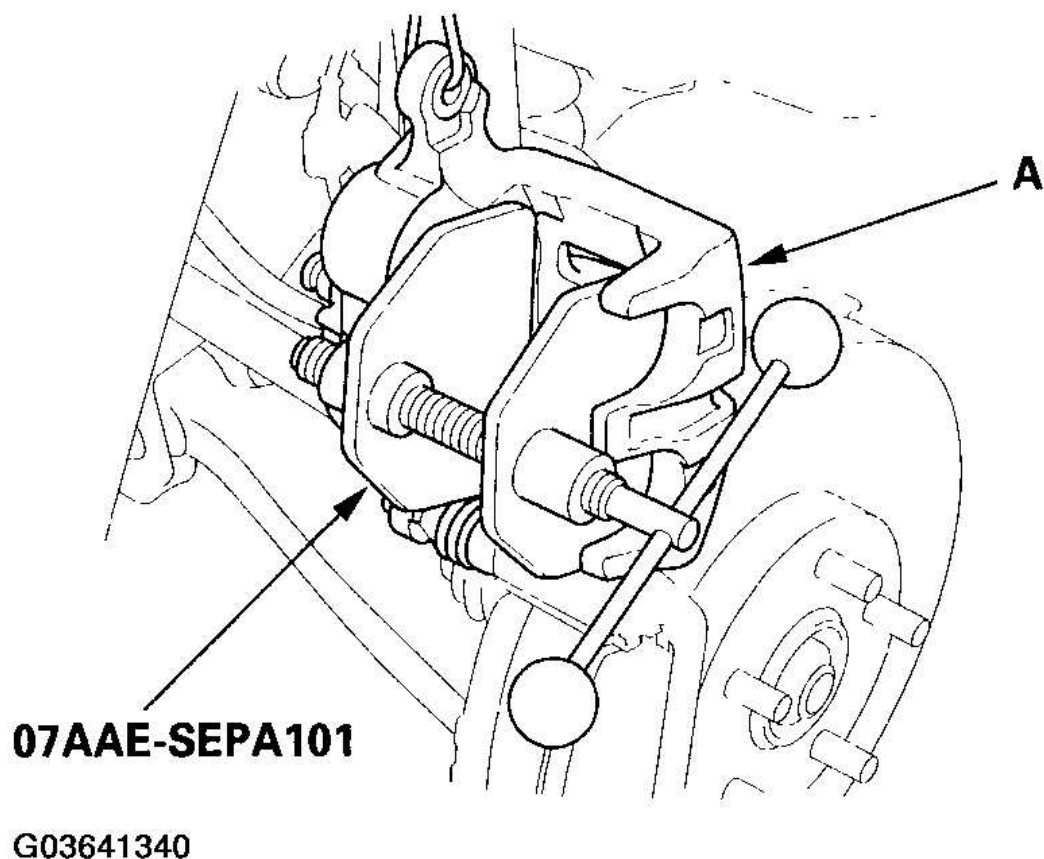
Mounting Brake Caliper Piston Compressor On Caliper
